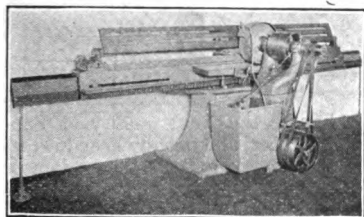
EXTRA HEAVY AUTOMATIC KNIFE GRINDER.
